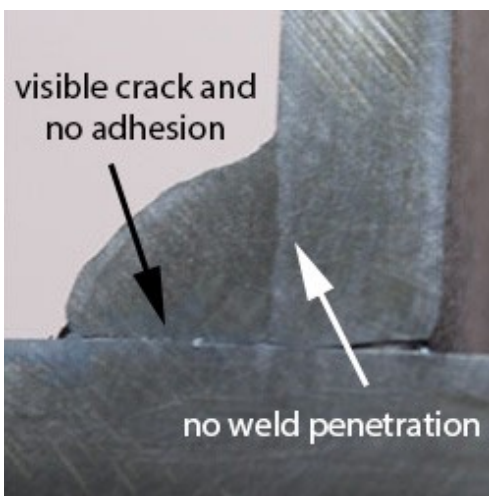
Cut and Edge Weld Testing (Westberg Sheetmetal, 2020)
